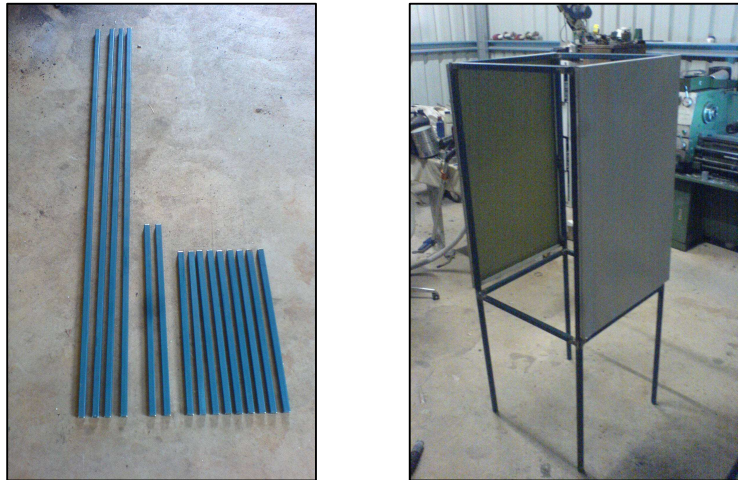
Cut lengths of $\frac{3}{4}$ Box section welded together to make frame (outer skin has already been added)
